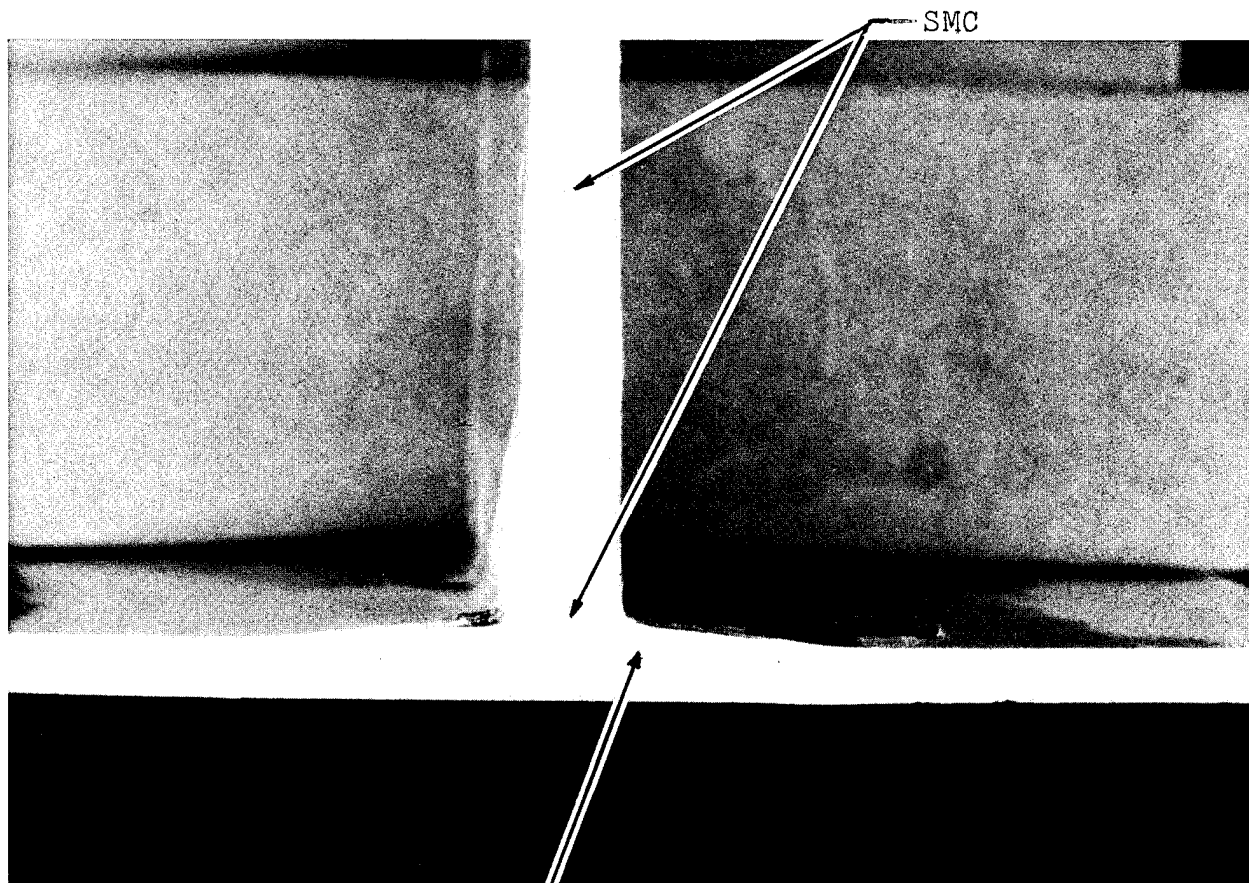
CROSS SECTION OF MOLDED RIB SHOWING FLOW
